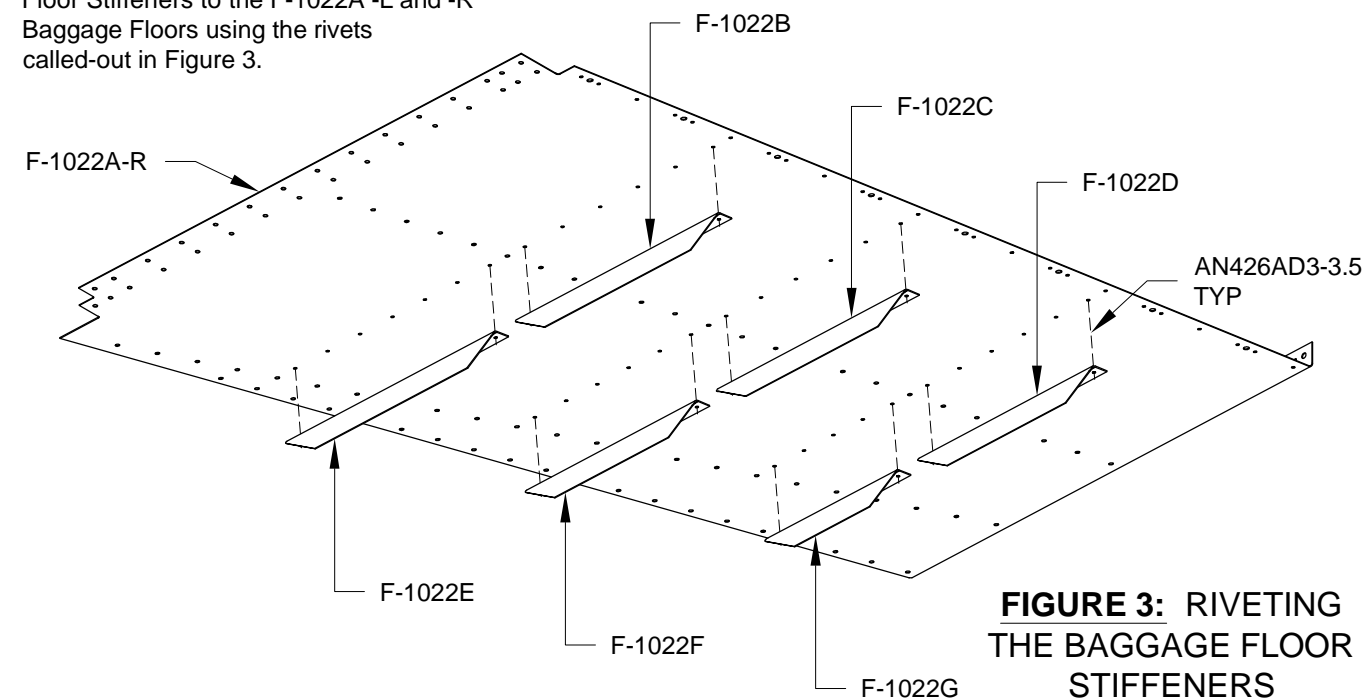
RIVETING THE BAGGAGE FLOOR STIFFENERS
